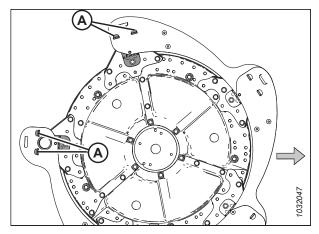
Reel Endshield Removed – Inboard Cam End
